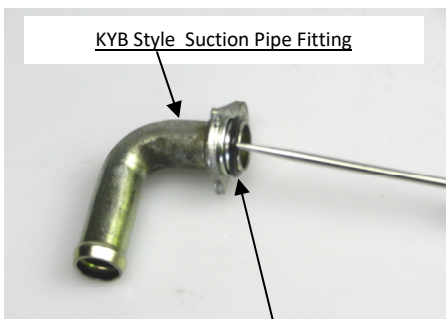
New O-Ring installed onto fitting with small amount of grease on O-Ring for installation to pump housing.
